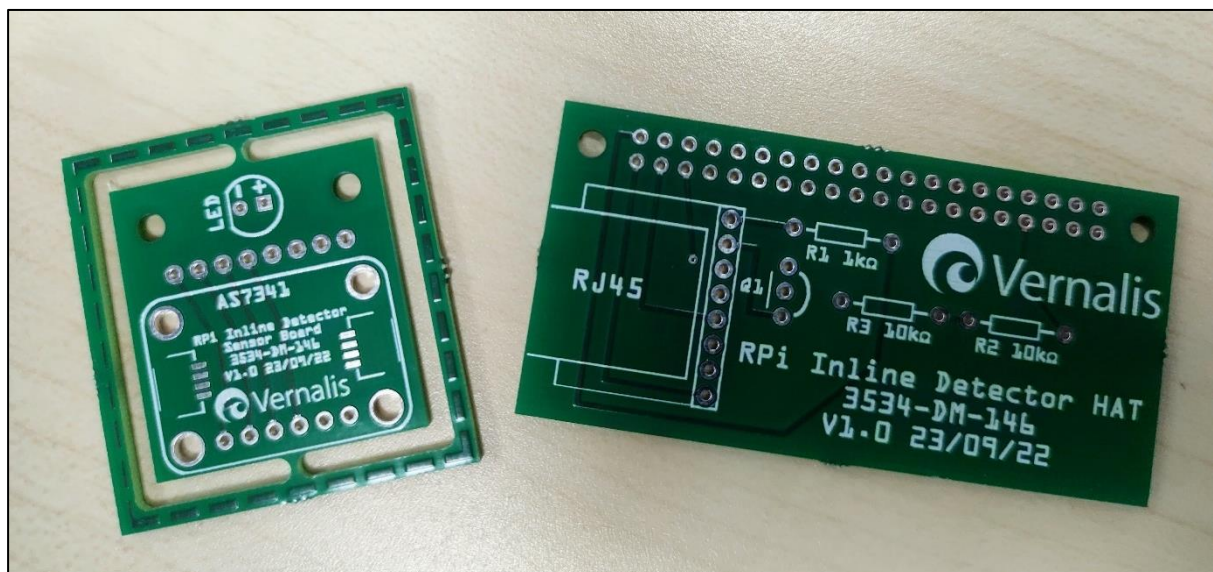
Custom PCBs as delivered. Note - smaller detector board has manufacturing excess that requires removal
